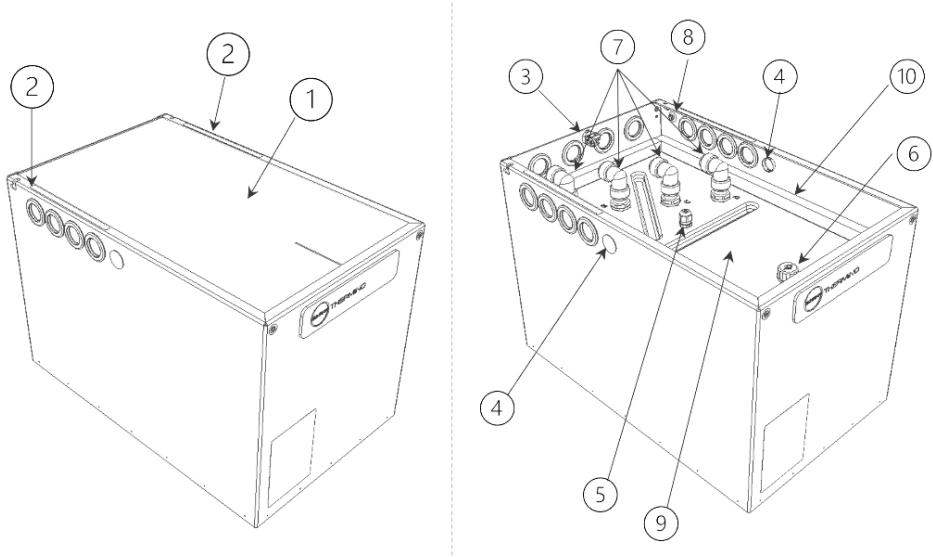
Internal interfaces, lid removed (left), Top insulation removed (right)
